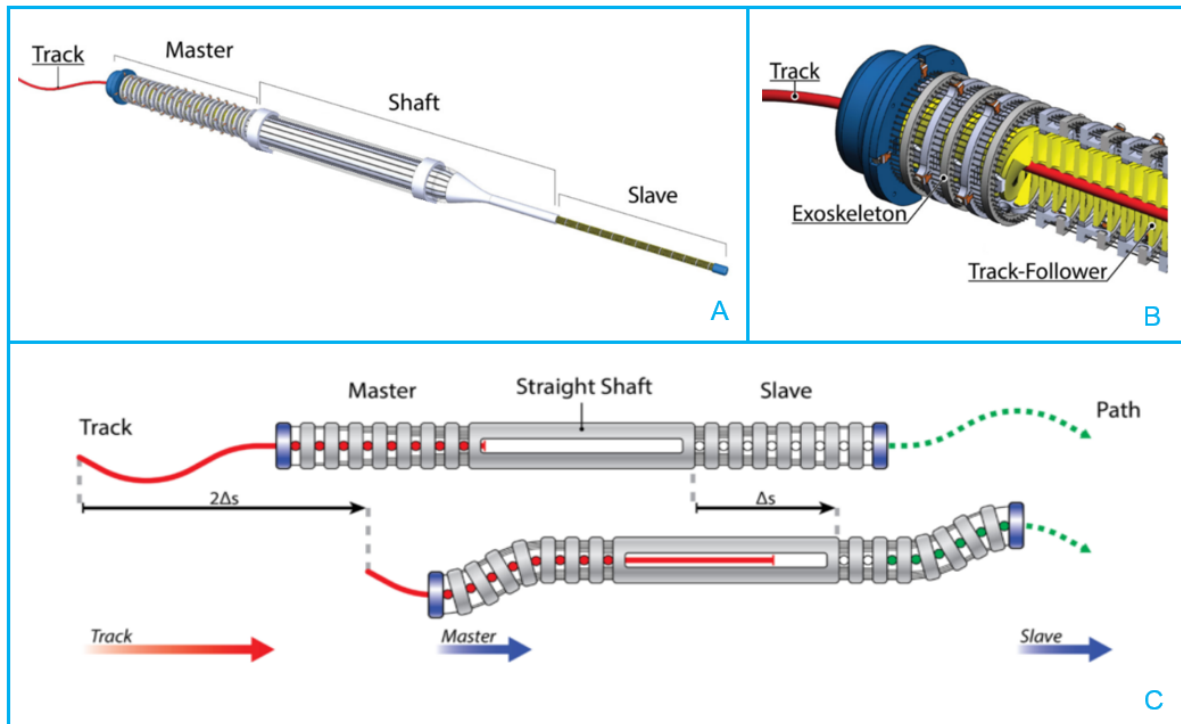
CAD images of the MemoFlex I prototype. Figure A shows the main components of the master-slave mechanism. The handle is the master and the compliant shaft is the slave. Figure B is a section of the handle of the tool. The predefined track (red) deforms the track-follower (yellow), ultimately deforming the exoskeleton, incorporating the steering cables. Figure C shows the master-slave mechanism and how the path is inserted and formed. The deformation of the master, because of the inserted track, causes the pulling and releasing of cables attached to the slave's segments. As a result, the slave copies the shape. The images are adapted from Henselmans (2017) [21].
